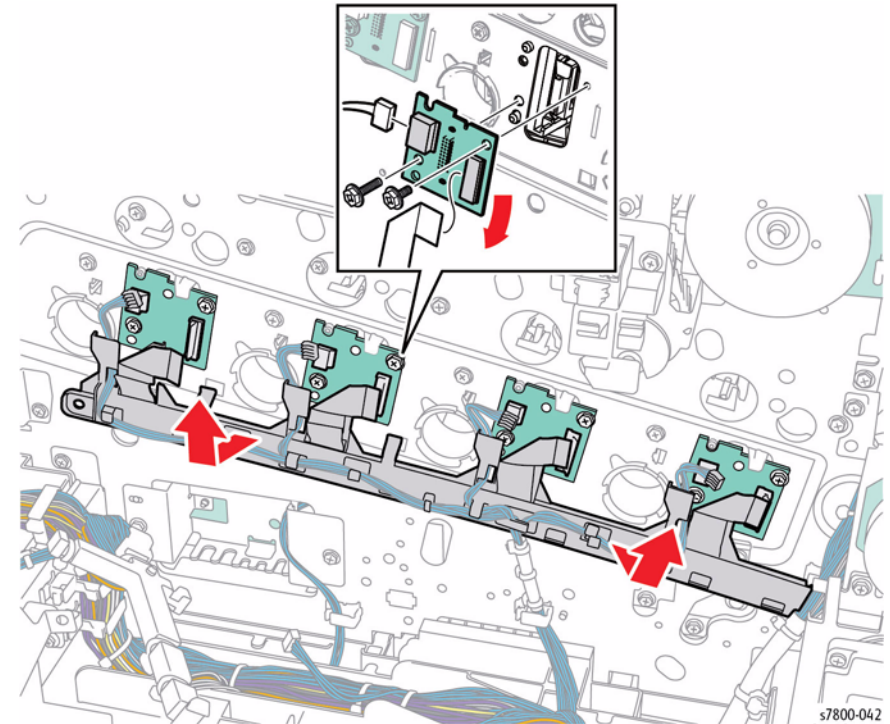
Removing the LPH Cable Assembly and LPH PWB
